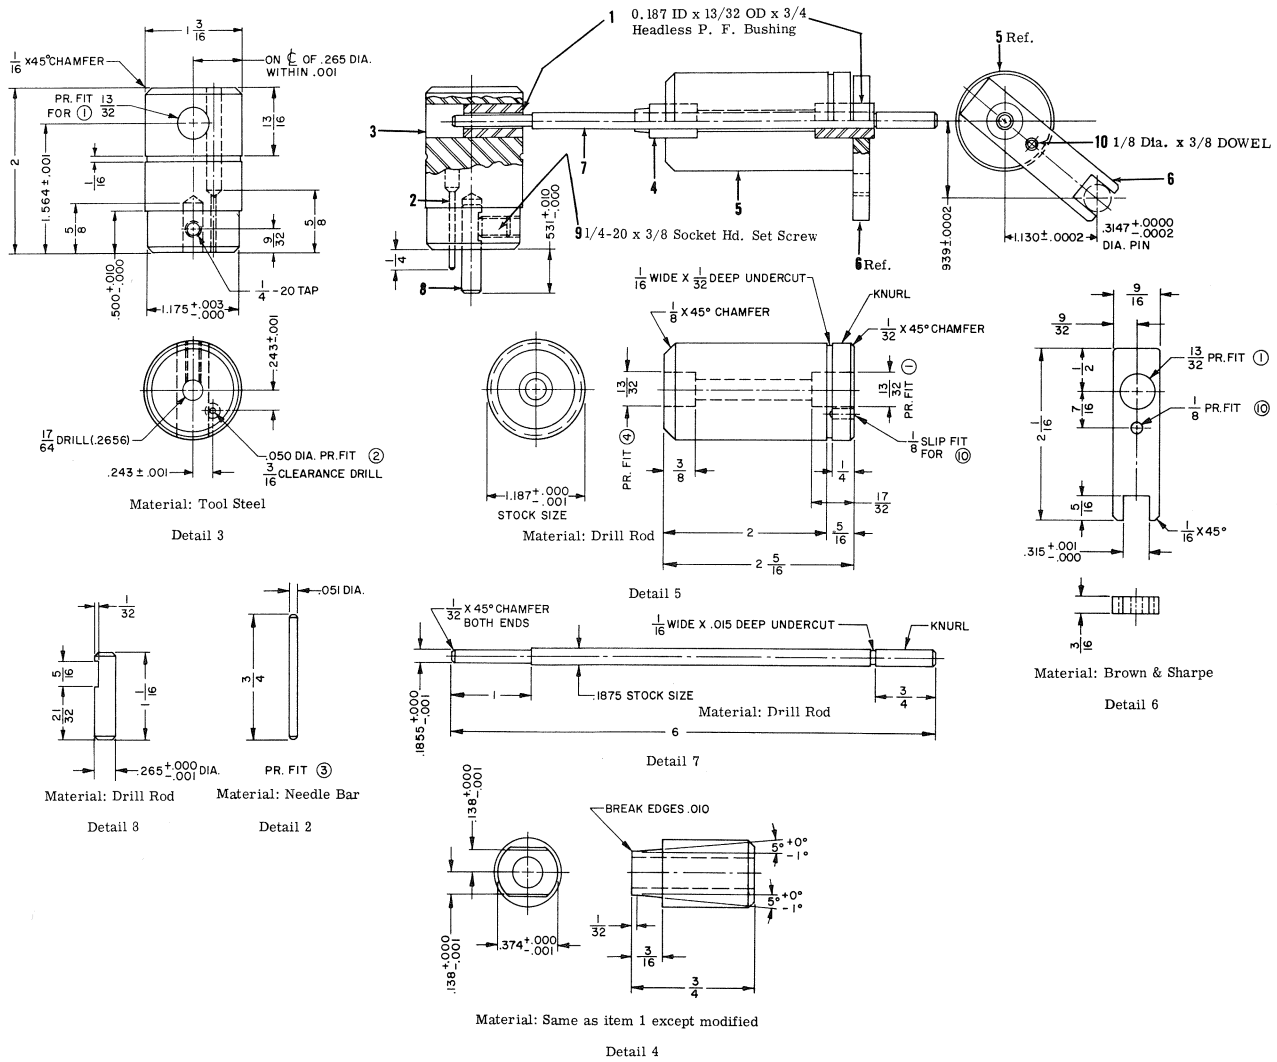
LAMP AND OPTICAL PATH ALIGNMENT TOOL G3-38000
